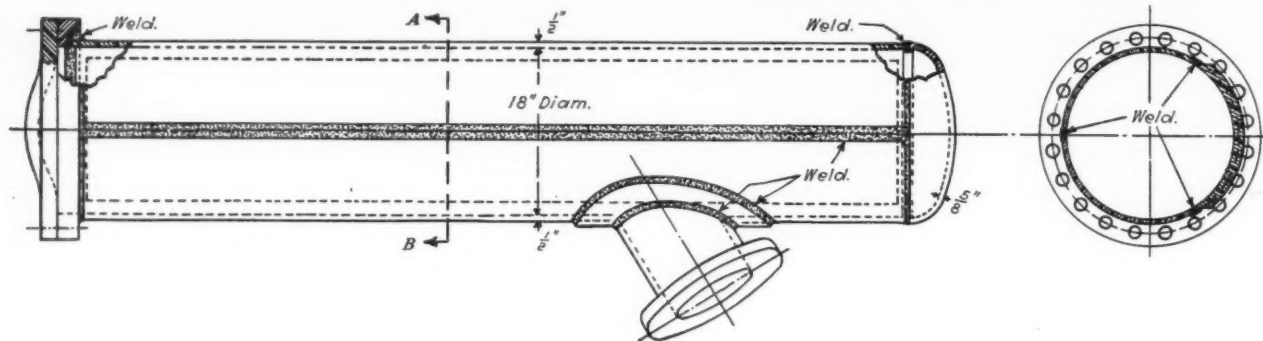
GENERAL DIMENSIONS OF DRUM TESTED, SHOWING LOCATION OF WELDS
